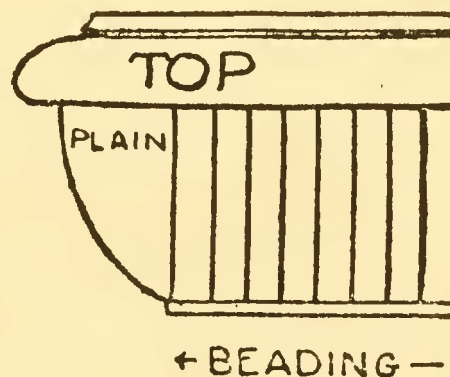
MITRED CORNER OF BEAD MOULDING.
